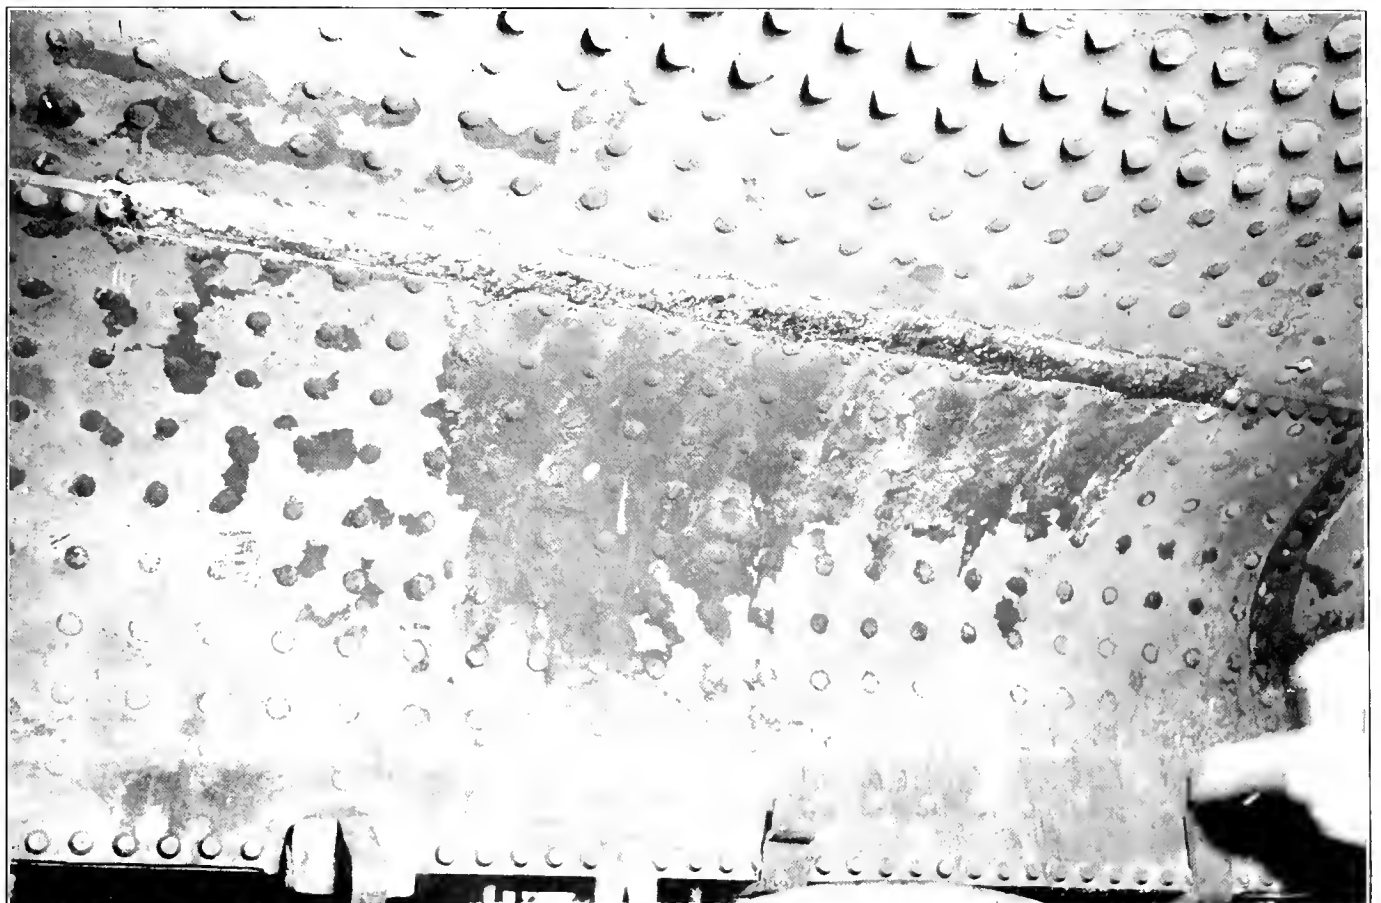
A Longitudinal Seam. Over 6 ft. Long, Repaired by Electric Welding.
